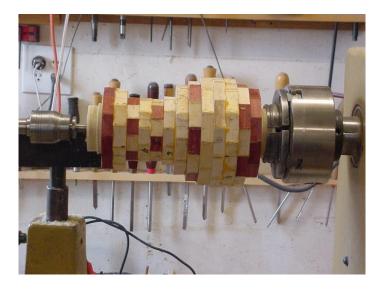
Both halves of a vessel on the lathe ready for turning. This goblet has an open top and thus can be turned whole. If it were a closed vessel or one with a small top hole, it would be turned in pieces and then assembled.
